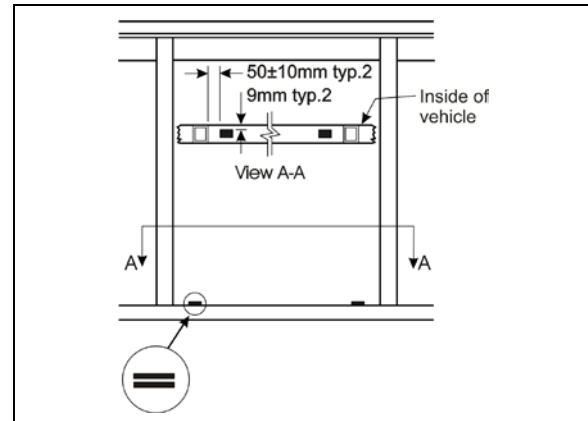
FACE FIXED WINDOW INSTALLATION
